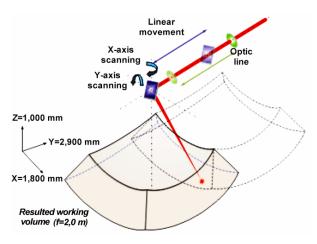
Adjustable focalization optical system and working volume of the remote laser welding cell at CLIPM
